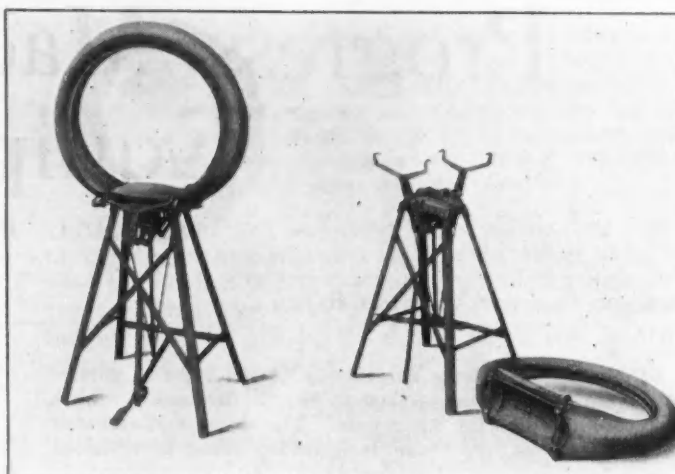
TIRE SPREADER THAT NOT ONLY SPREADS THE CASING TO ENABLE REPAIRS TO BE MADE, BUT ALSO TURNS IT INSIDE OUT AT ANY DESIRED POINT FOR INSPECTION
